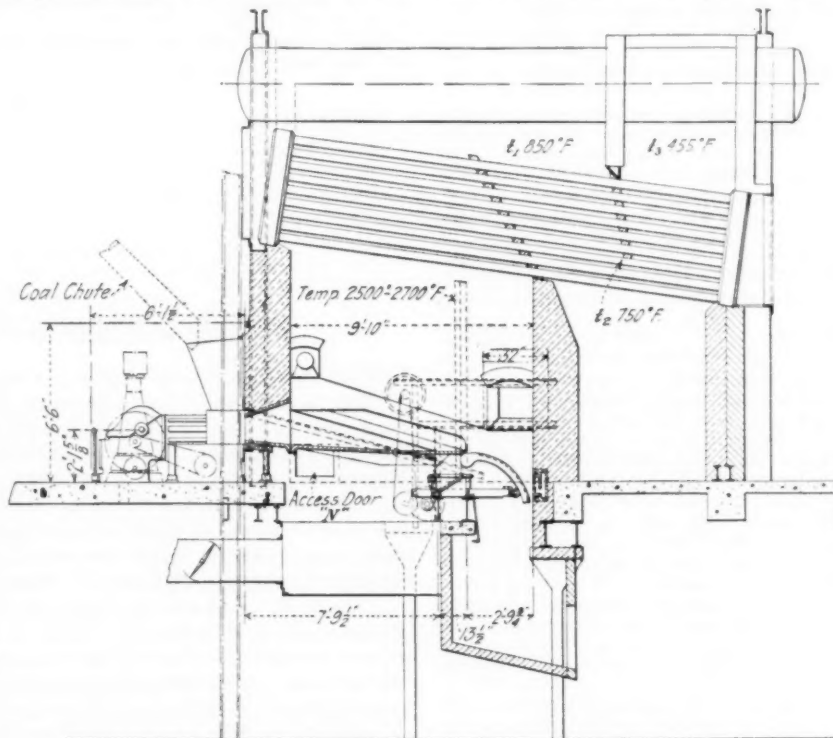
ASSEMBLY OF BOILER AND COMBUSTION EQUIPMENT INSTALLED AT PLANT OF BROWN & SHARPE MFG. CO.
